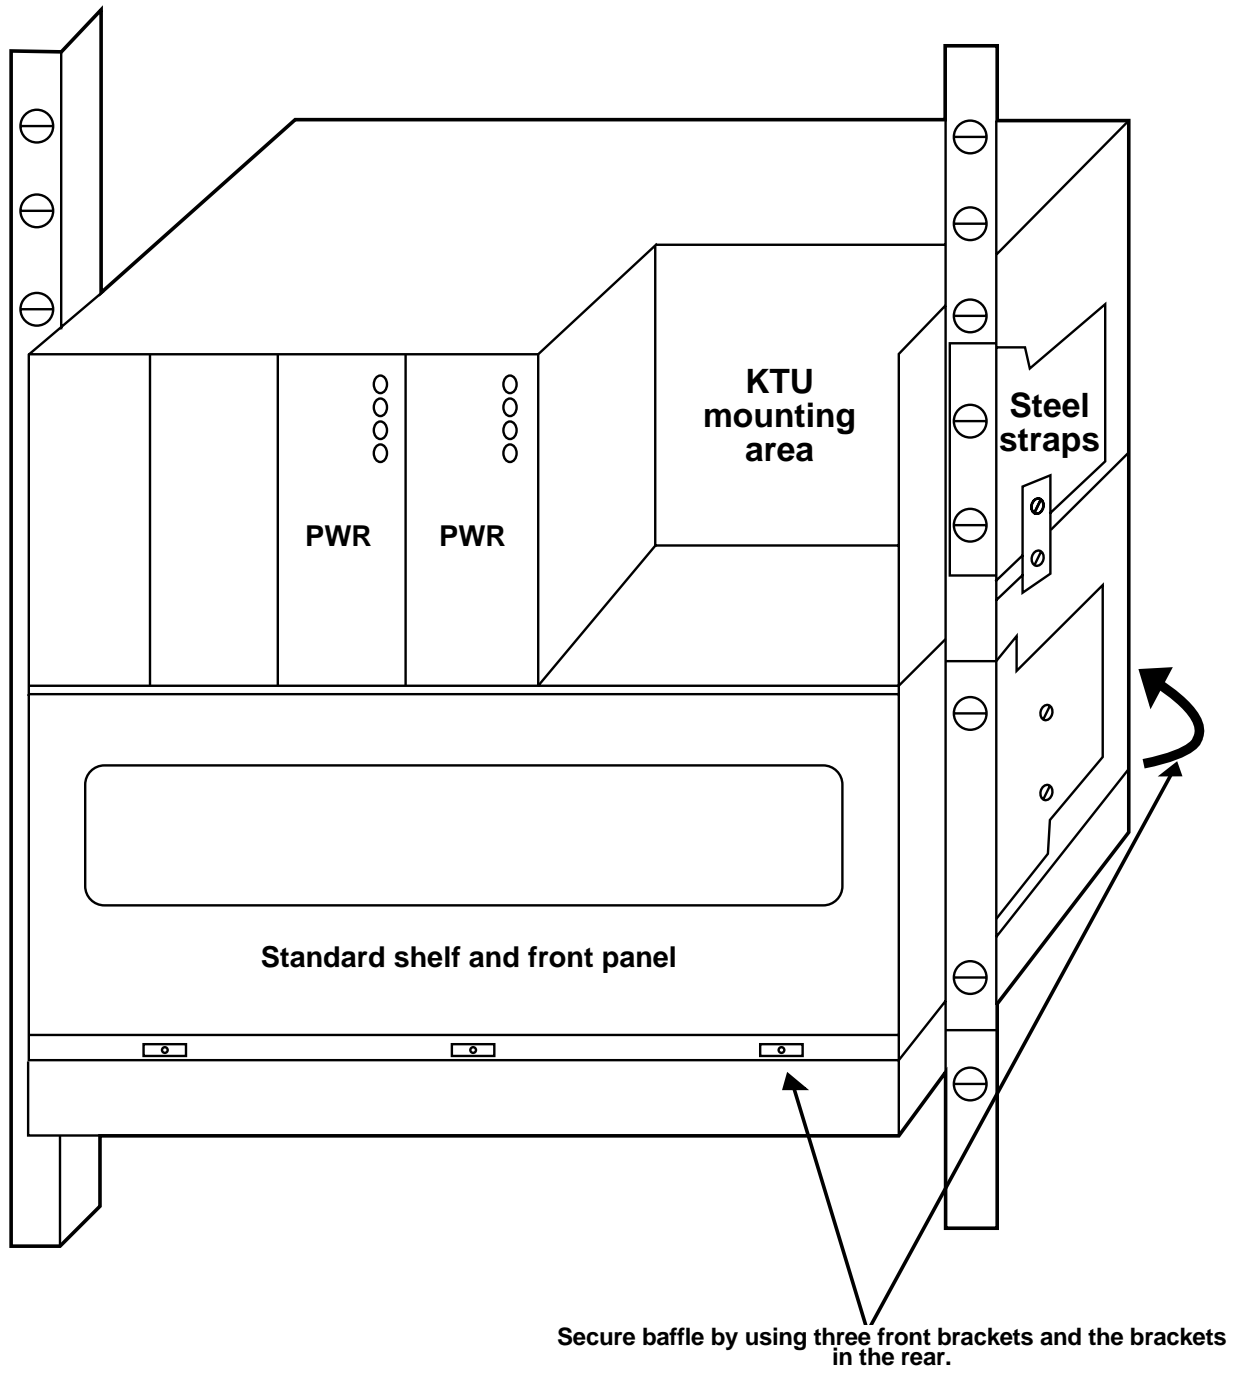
Attaching Heat Baffle to Shelf Bottom.
